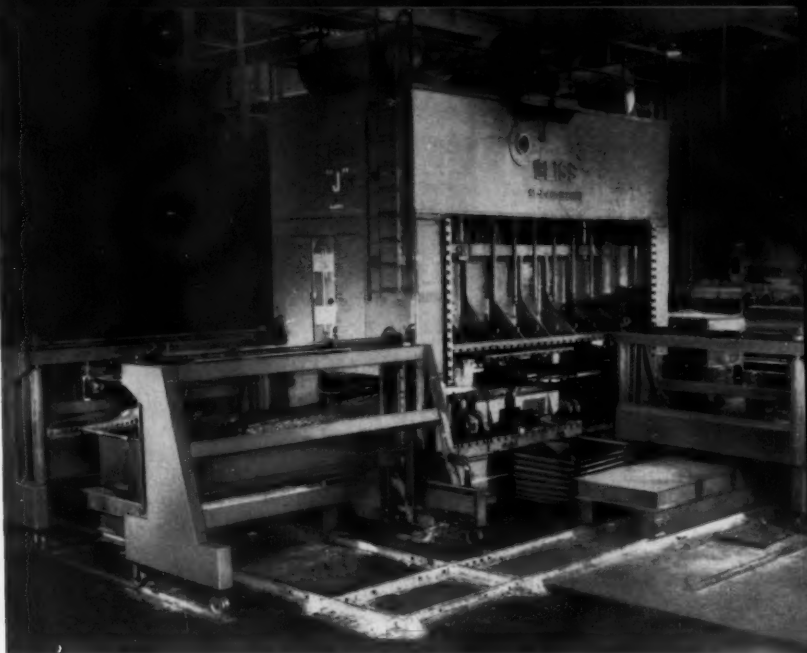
The view shows the first unit of a four-press welding installation for the Plymouth rear floor-pan assembly.
